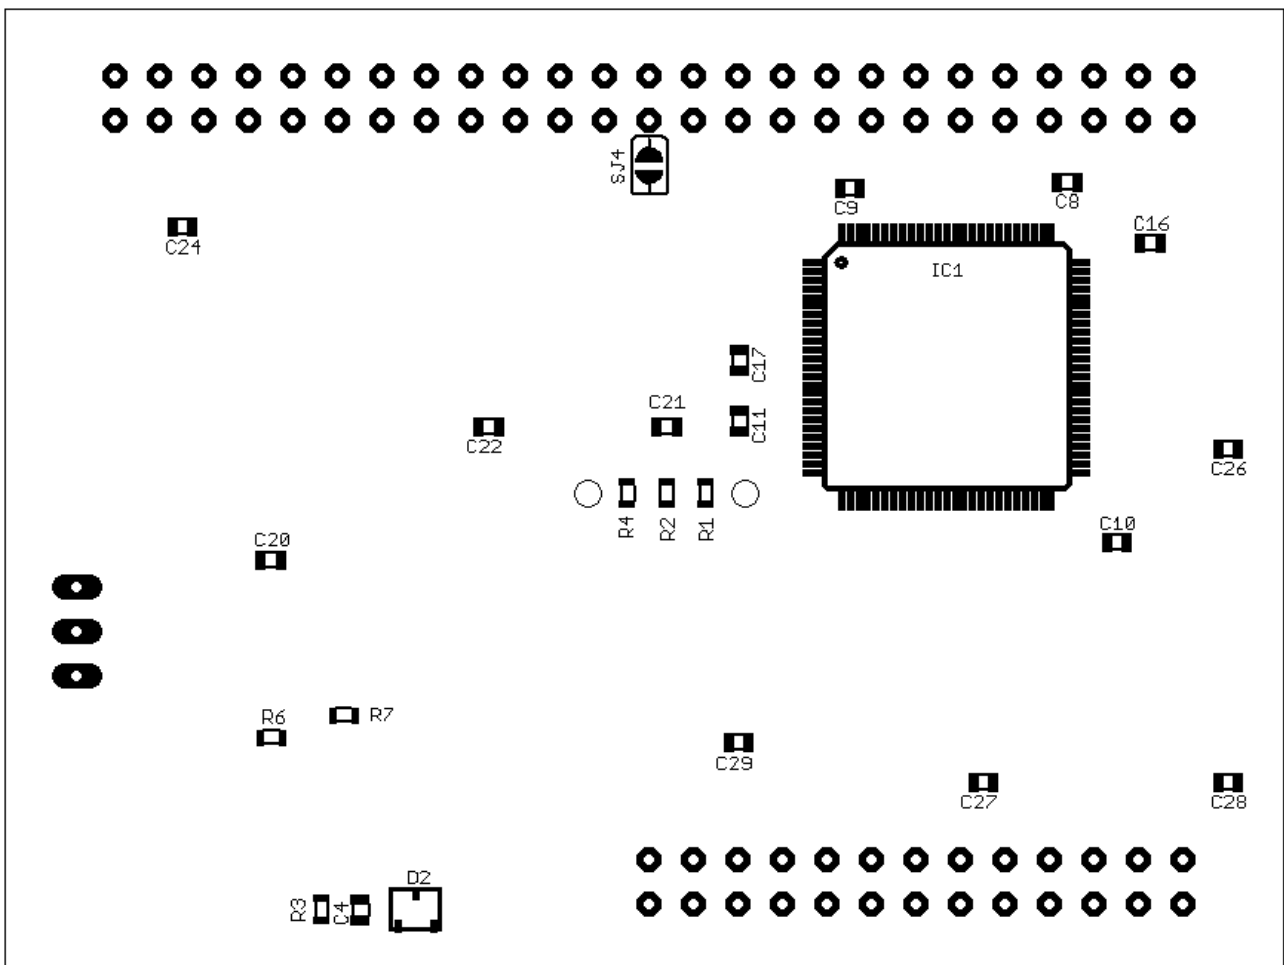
Bottom View of the ACSI-SCSI Adapter with partial Mounting of Components.
